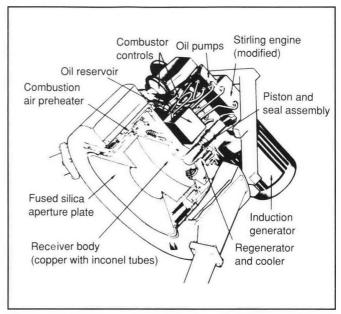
Hybrid receiver using a gas-fired burner with a United Stirling Model 4-95 Stirling engine
